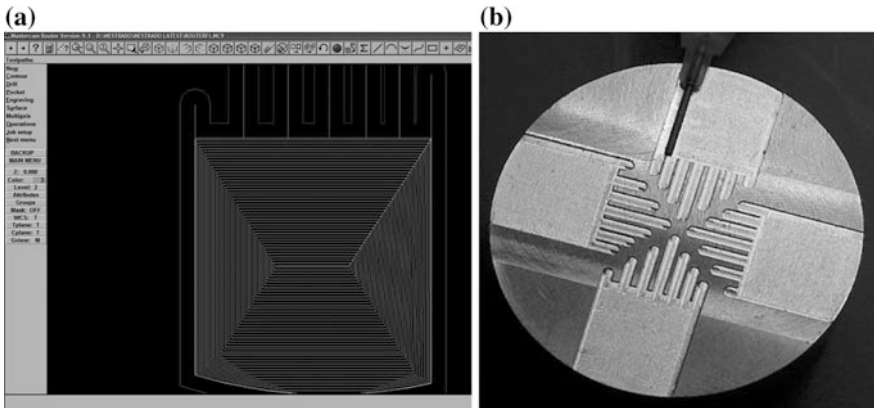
Machining strategies using feed rate of $6 \mu\text{m/tooth}$: a constant overlap spiral; b photograph of a micromilled surface on aluminium samples using 0.8-mm-diameter end mill [16, 17] (with kind permission from ‘Taylor & Francis’, ‘Russian Academy of Science’)
